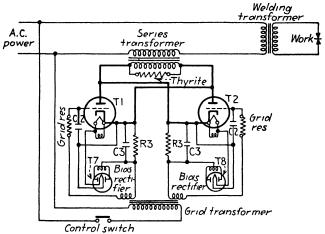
Typical welding circuit using controlled rectifiers.
